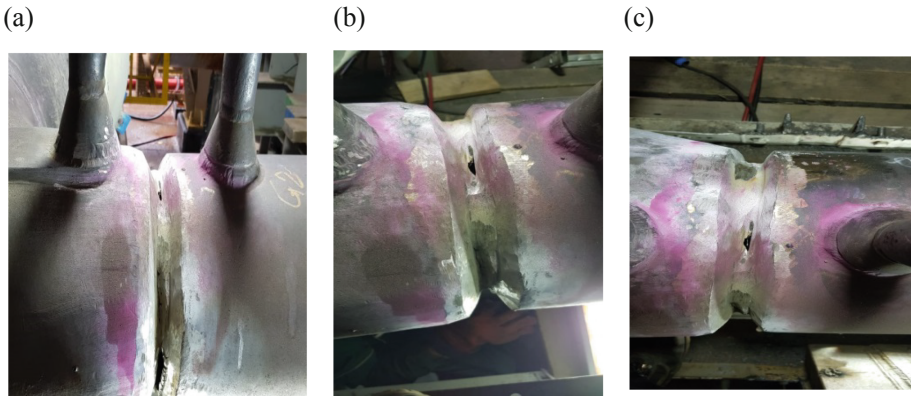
Root bead of butt weld. *Source:* Images made by the authors
